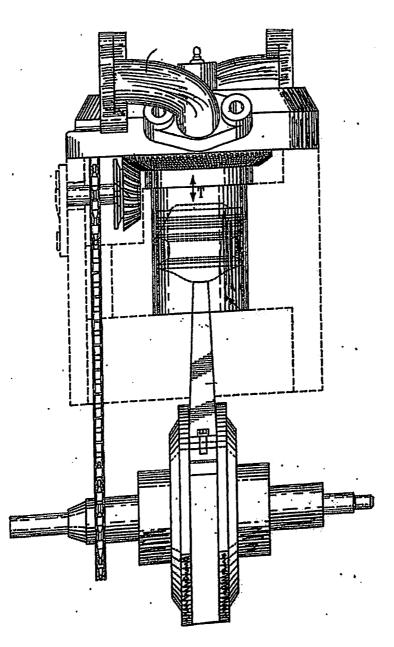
Front view of the Disc Valve System showing the cylinder box and cylinder in
